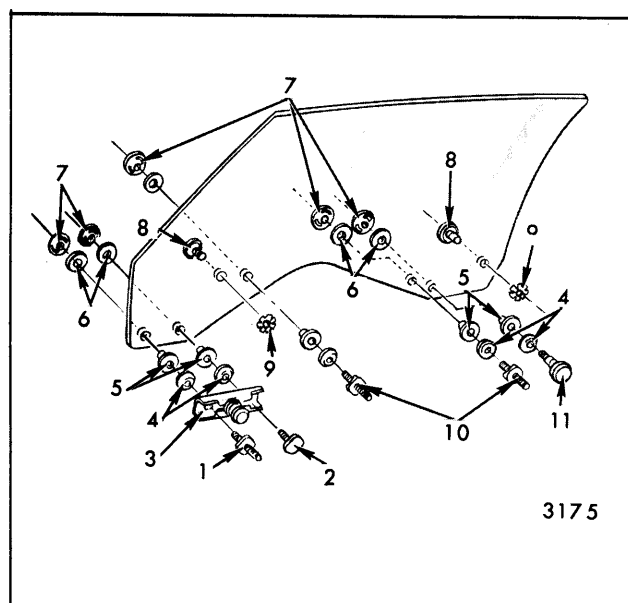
Front Door Window Assembly "A-37, 67 and 87" Styles and "G-57" Styles
